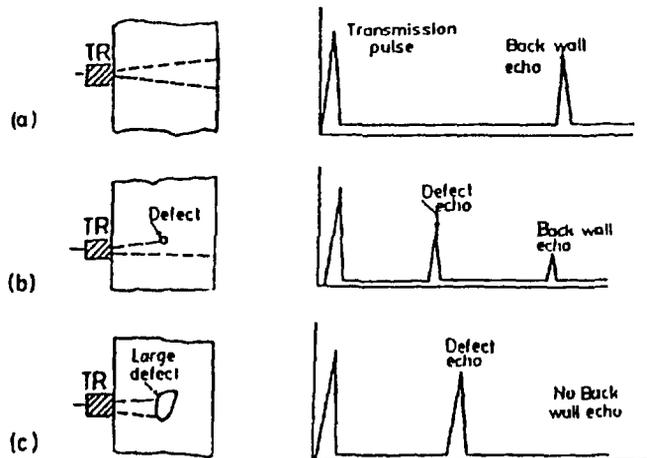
Principle of pulse echo method of ultrasonic testing. (a) defect free specimen (b) specimen with small defect (c) specimen with large defect.
